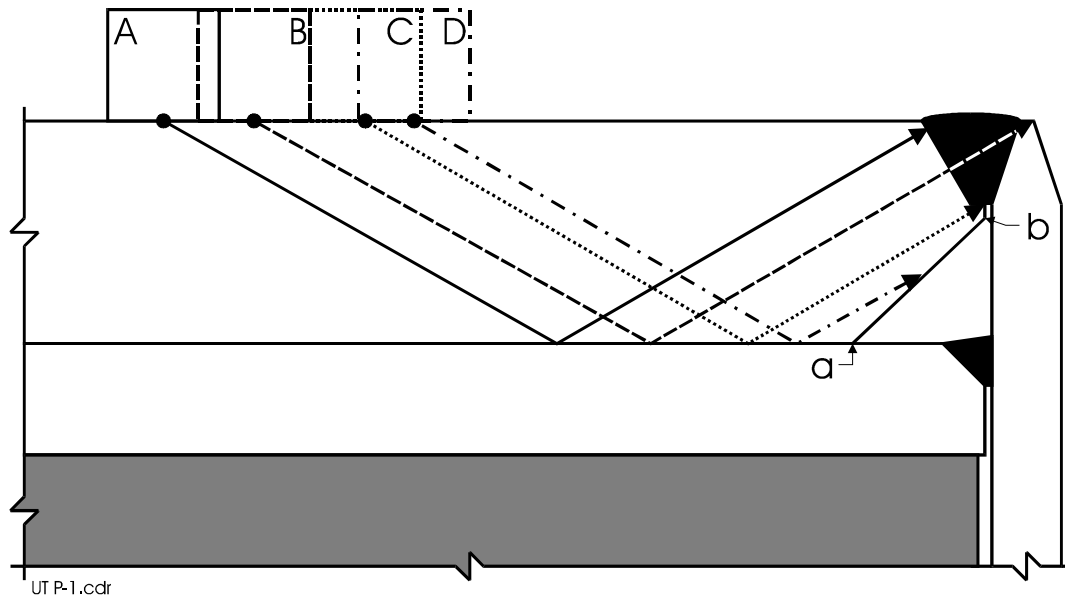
Outside Shell Chamfer and J-Bevel Weld Prep Nose Challenges to Angle Beam UT Examination
